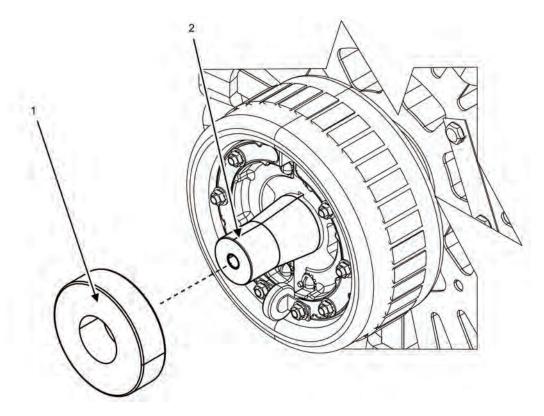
50/60 Hz Generator Bearing Removal — Detail.
